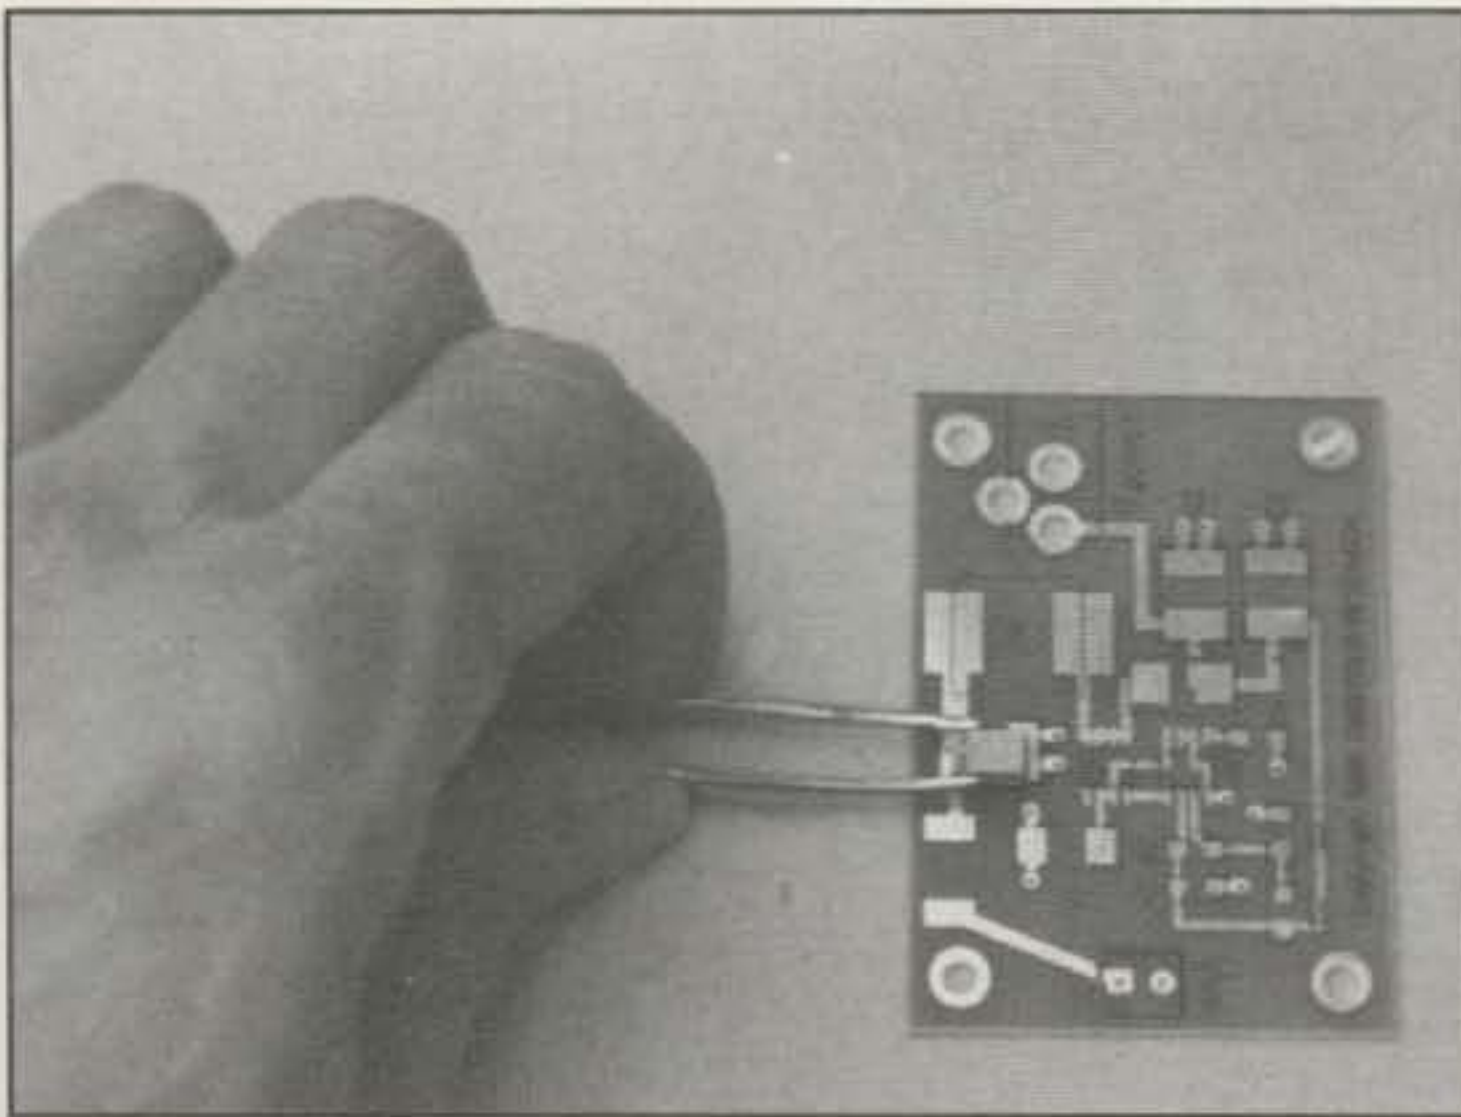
Using tweezers to hold the component in position, I will reheat the solder on the pad of photo 3. Instantly, it will flow onto one end terminal of the component. After it cools, I will solder the other end terminal to its related pad and then check my work with pinpoint-tip ohmmeter test leads.
